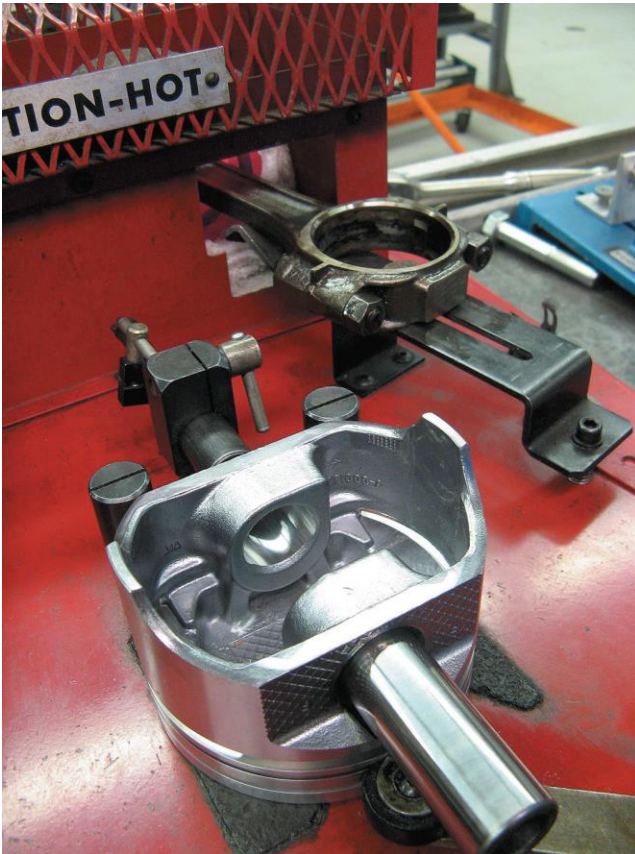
The piston pin is pushed into the heated small end of the connecting rod.
